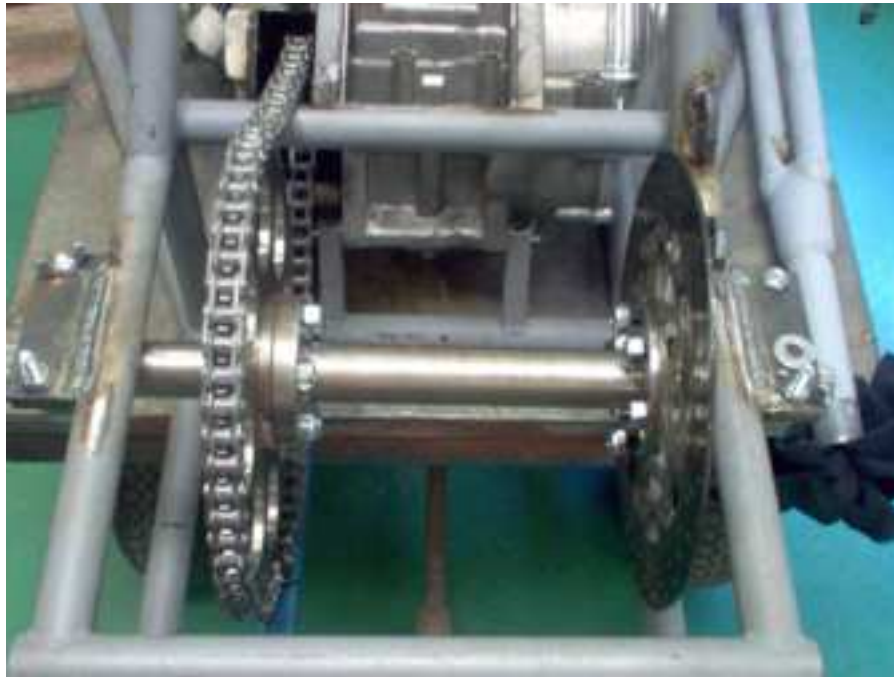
Rear assembly with spacer behind drive sprocket.
